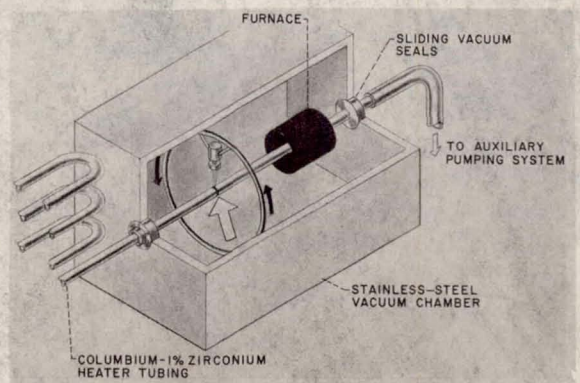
Columbia-1-percent-zirconium tube heater. Electron-beam welding.
